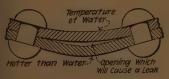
Leakage in fire seam when pitch of rivets is too large and allows bulging.
